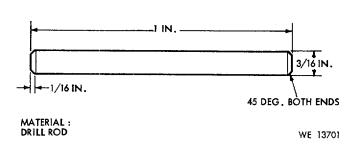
Improvised tool for assembly and installation of hammer and cocking lever.
